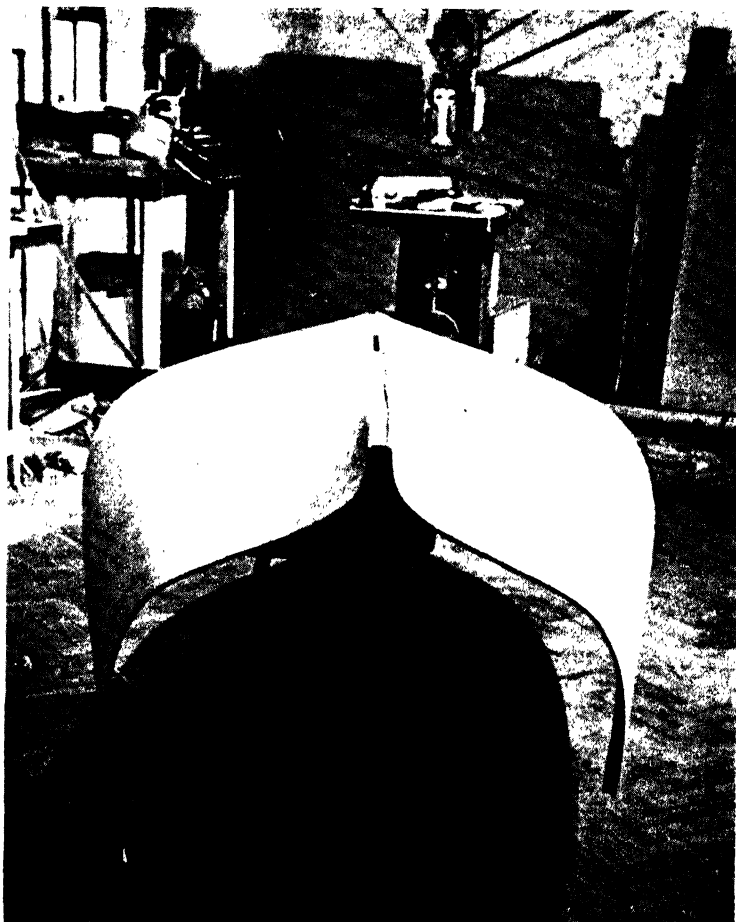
Finished boat shell removed from mould<sup>14</sup>
